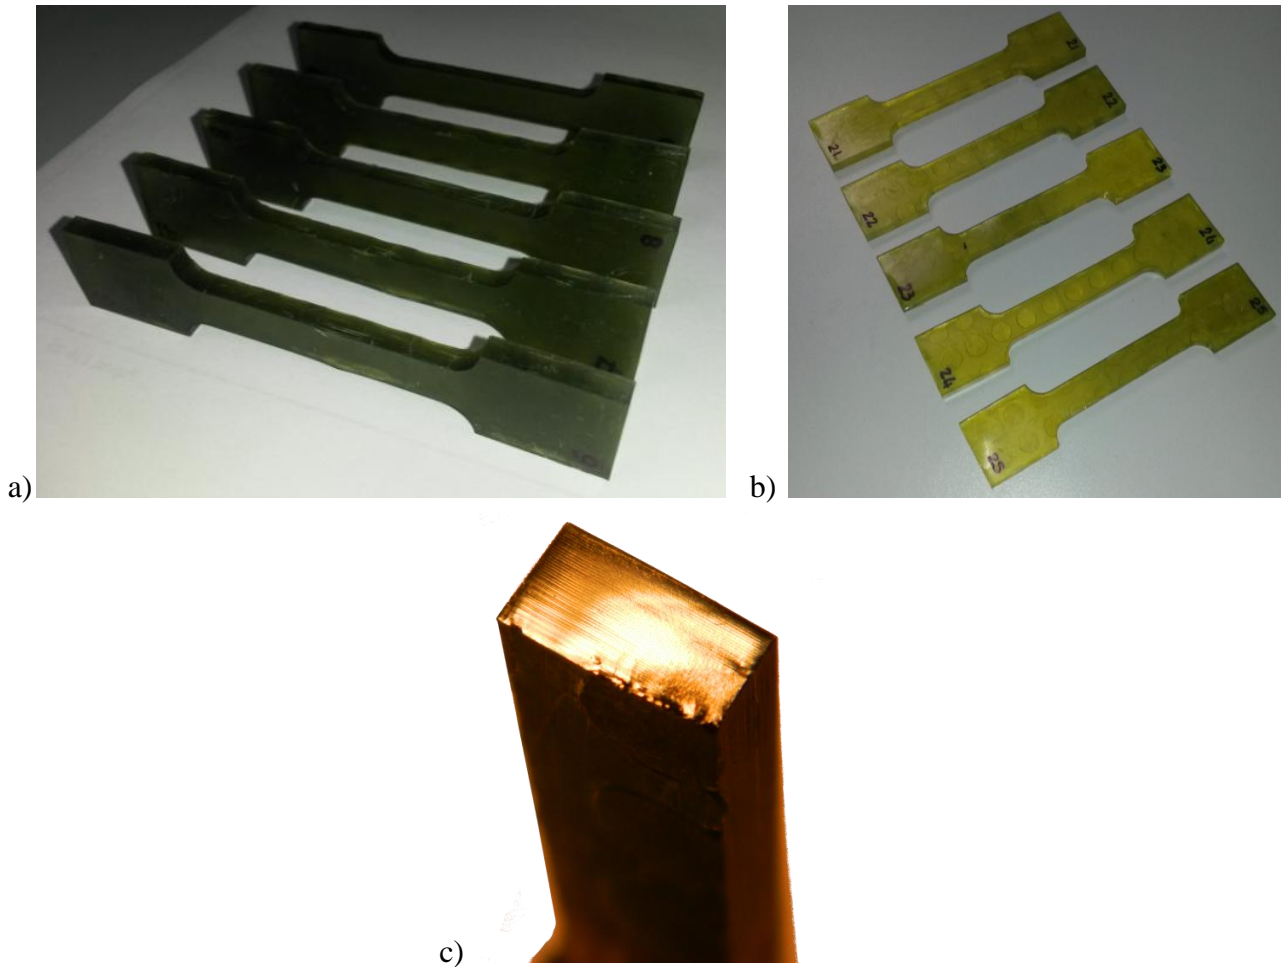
Samples 6-10 (opaque) (a) and 21-25 (clear) (b) and fracture surface (c).
